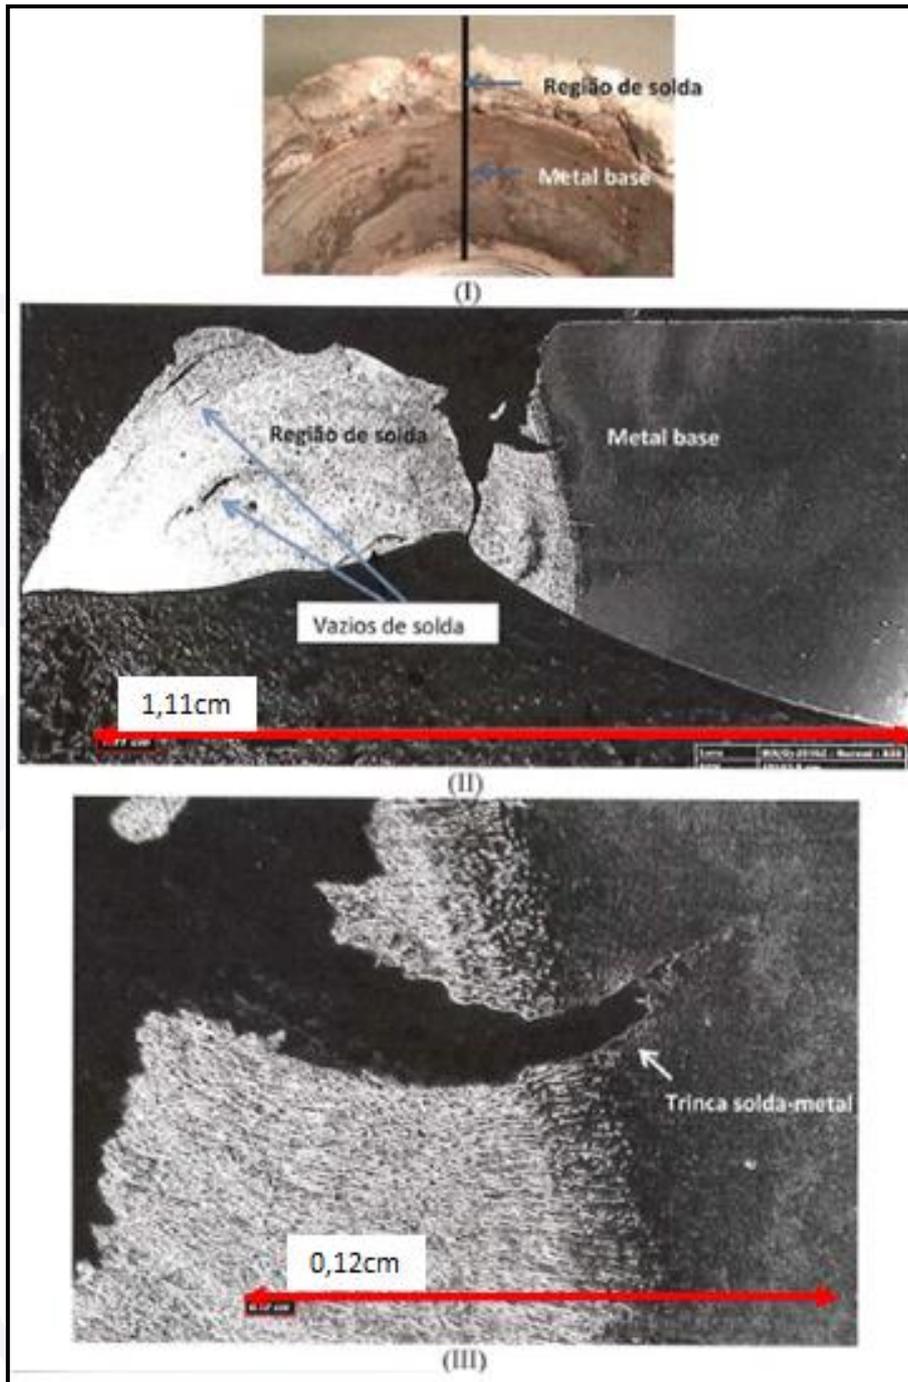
In (I), a detail of the weld region and base metal. In (II), it can be observed the metallographic section of the weld and the base metal. The welding region is void due to the inefficient welding process. In (III), it is possible to observe a crack originated in the region of weld and with advance in the base metal.
